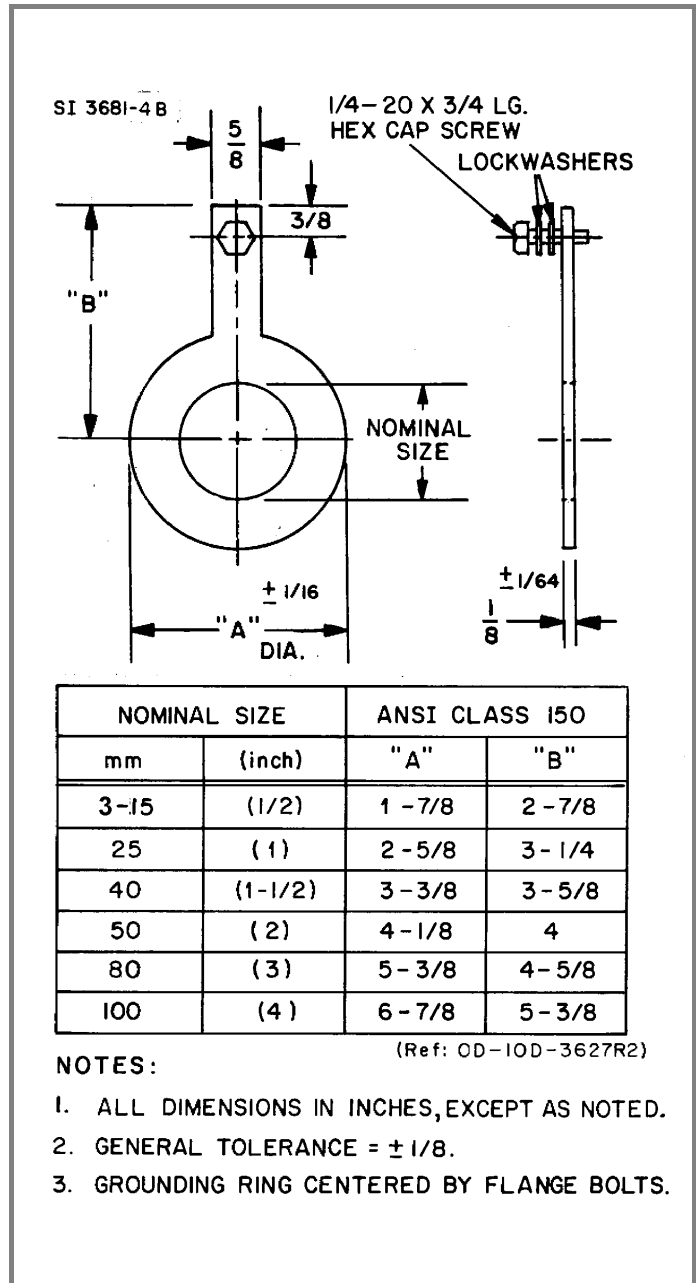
OUTLINE DIMENSIONS, GROUNDING RINGS
